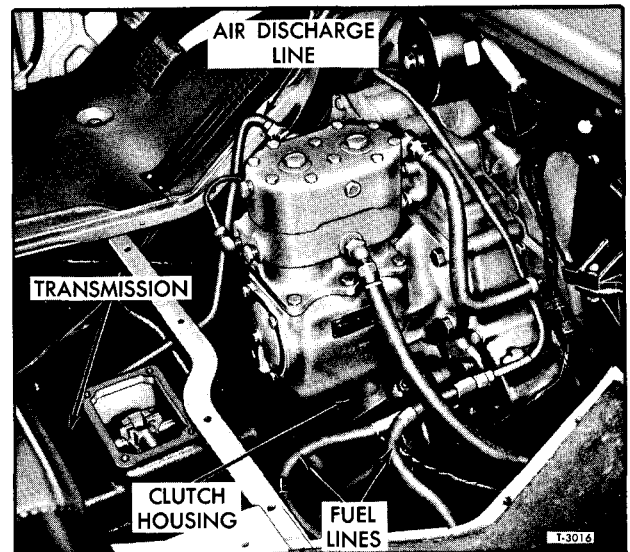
Access Cover and Floor Panel Removed from Cab (Typical)
